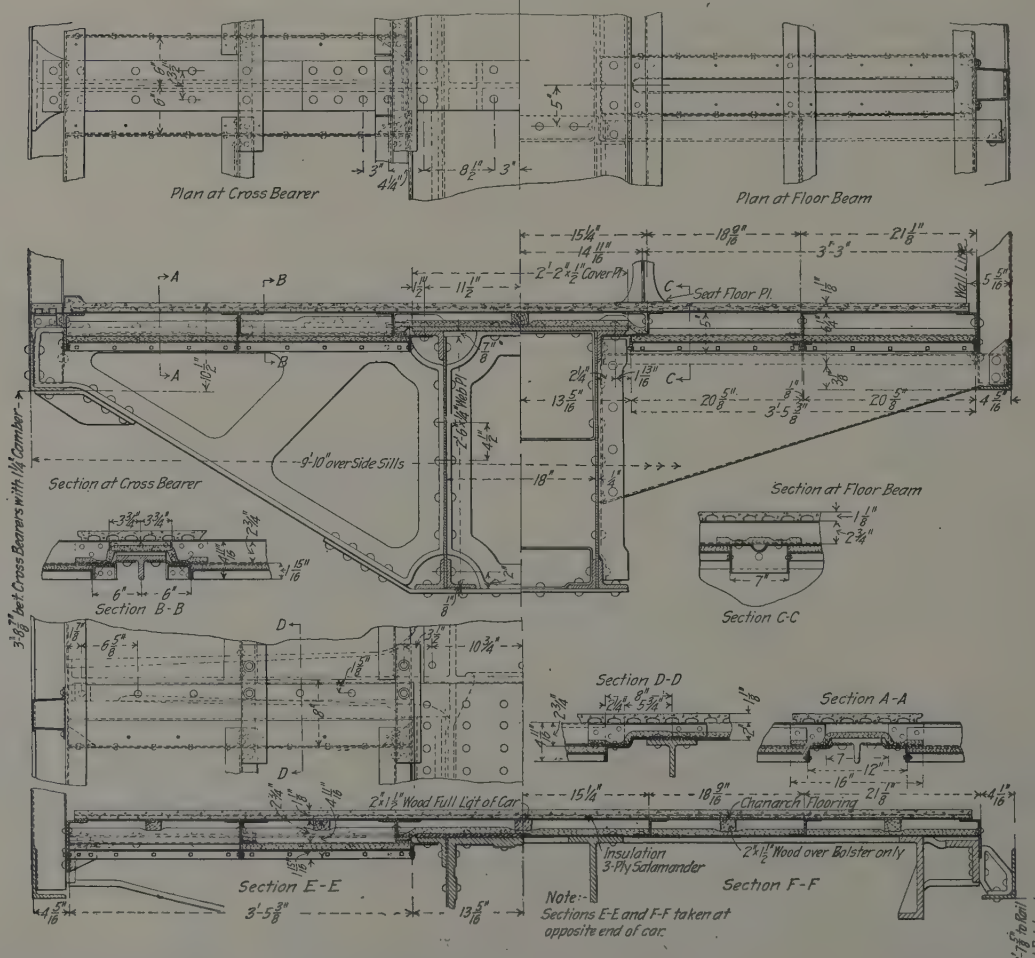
Cross Sections of Underframe of New York Central Steel Day Coach Shown in Figs. 489 and 492. These Sections Refer to Fig. 489.
